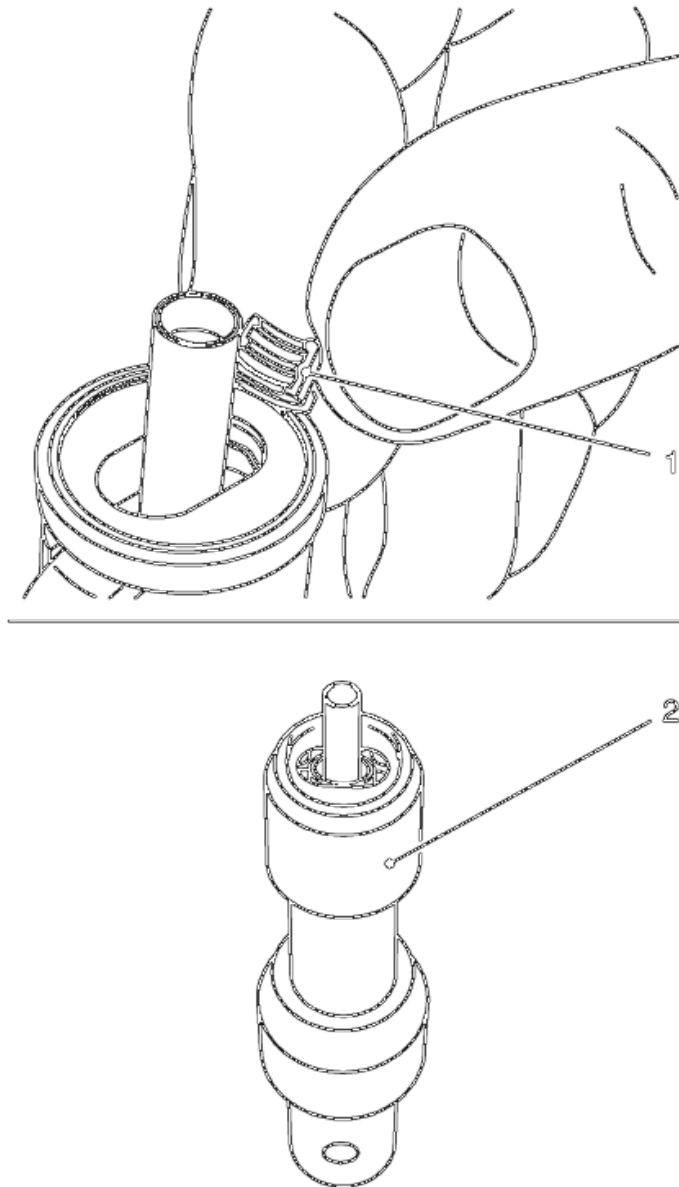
View Of Valve Cotters And Clamping Sleeve
